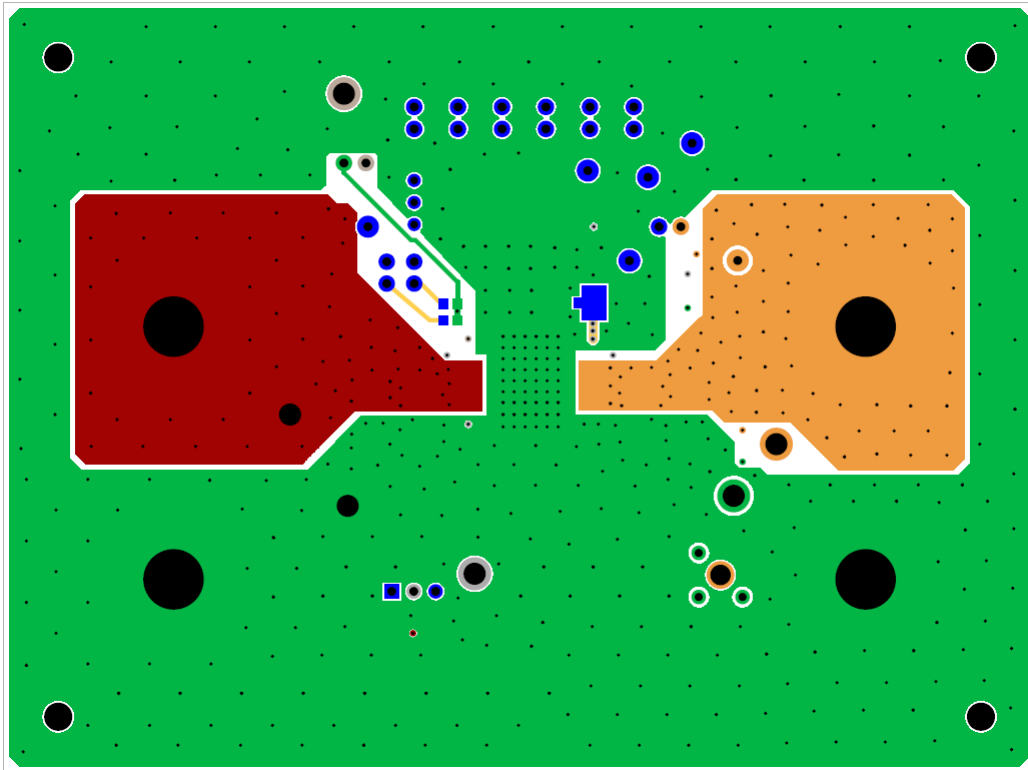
BOTTOM LAYER SOLDER SIDE
